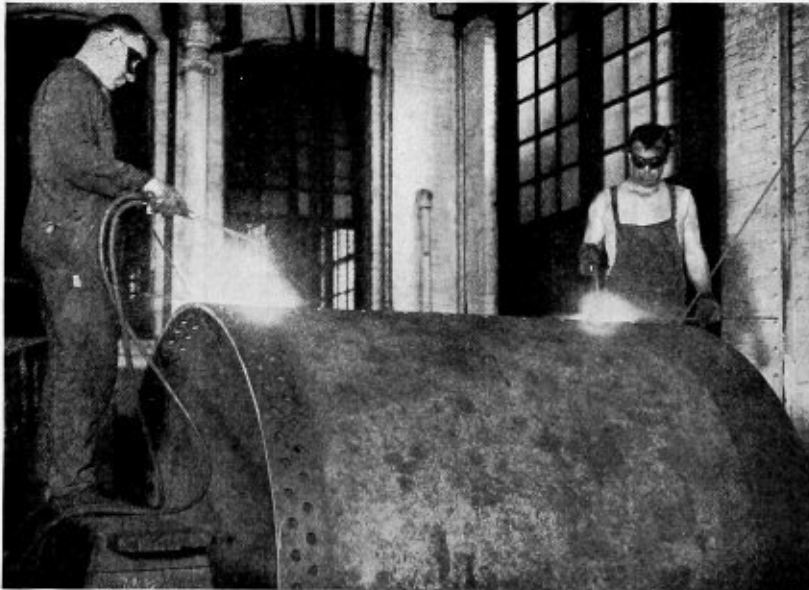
Operators Welding Part of Shell of Locomotive Boiler
